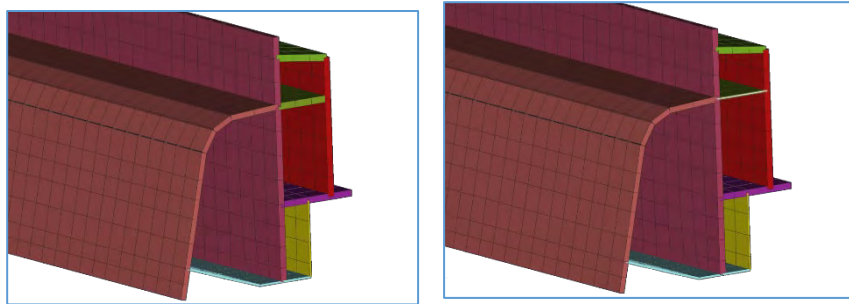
(a) Left: Initial rocker design, (b) Right: Modified rocker design
